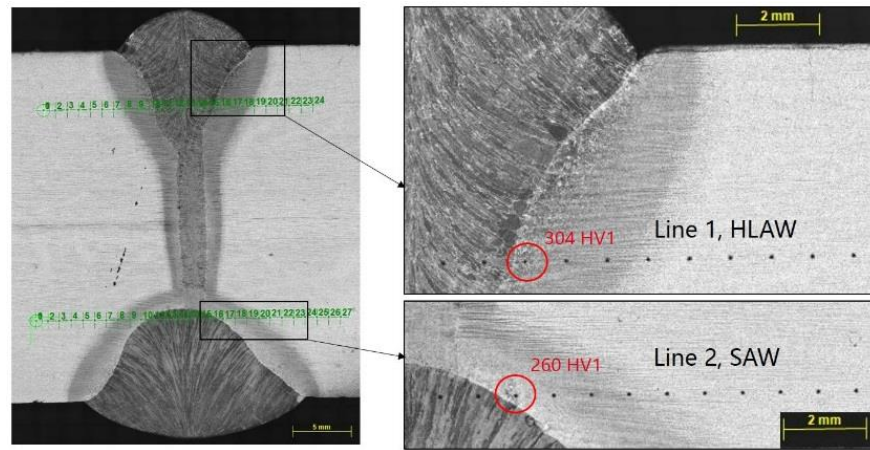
Location of the HV1 measurement points in the cross-section of the weld.
